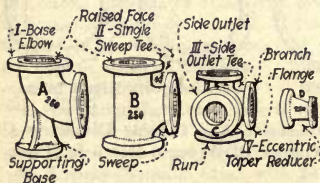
Extra Heavy Cast-Iron Fittings.
